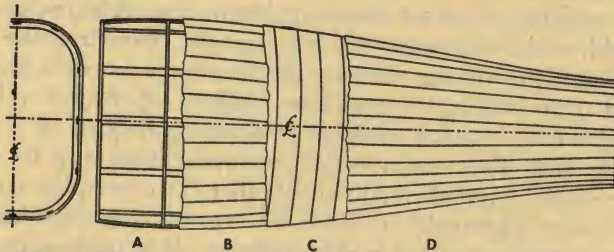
Exposed layers in a molded half fuselage.
